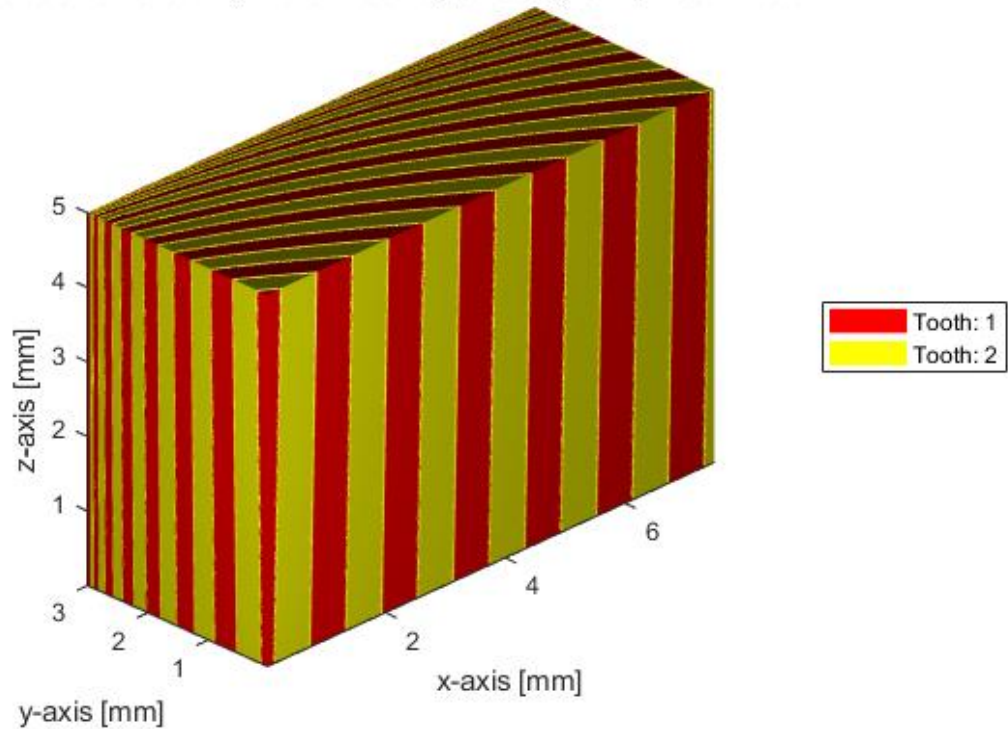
Visualization of the uncut chips removed from the workpiece by the 30 mm tool run at 0.6 mm/tooth.
